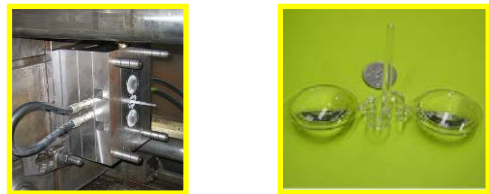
Lens mold installed of the injection molding machine and injection molded lens.
